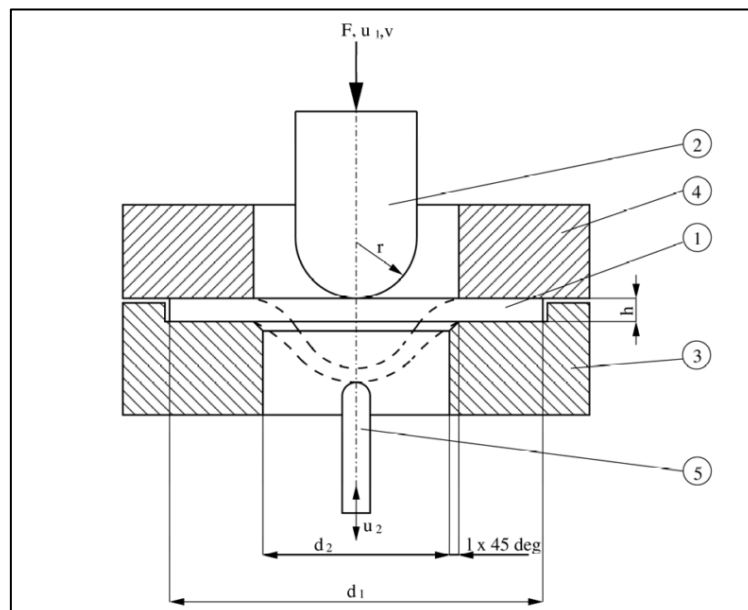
Cross-sectional scheme of the testing apparatus (1 – specimen, 2 – punch, 3 – receiving die, 4 – clamping die, 5 – deflection measurement rod) [18].
